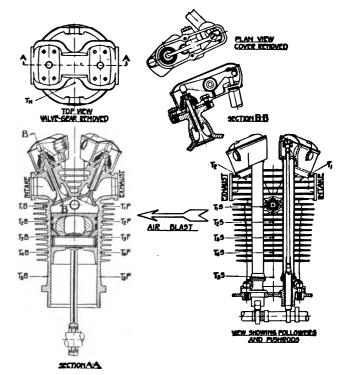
B. S. A., a new British air-cooled car uses this cylinder unit automobile to date. Incidentally, it is larger than any previous air-cooled machines, having a $3\frac{1}{4} \times 5$ in. six-cylinder engine, a wheelbase of 132 in., and $32 \times 4\frac{1}{2}$ in. cord tires. It really is a large car, and, of course, the price is in keeping for the touring car.
